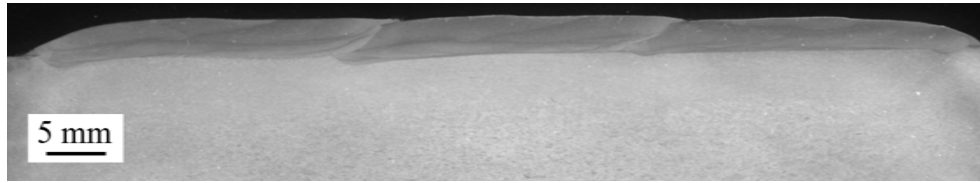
Cross-section of a sample welded with welding parameters B, plasma arc current 120 A
